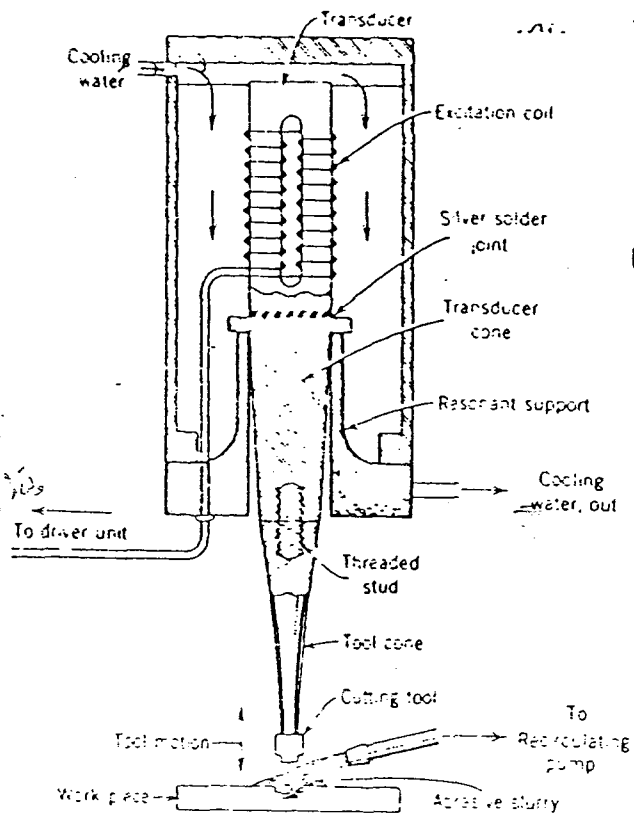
This schematic diagram shows a typical magnetostriction transducer and tool assembly that is used to cut a hole in a workpiece by means of ultrasonic impact machining. (Sheffield Corp. (2)
